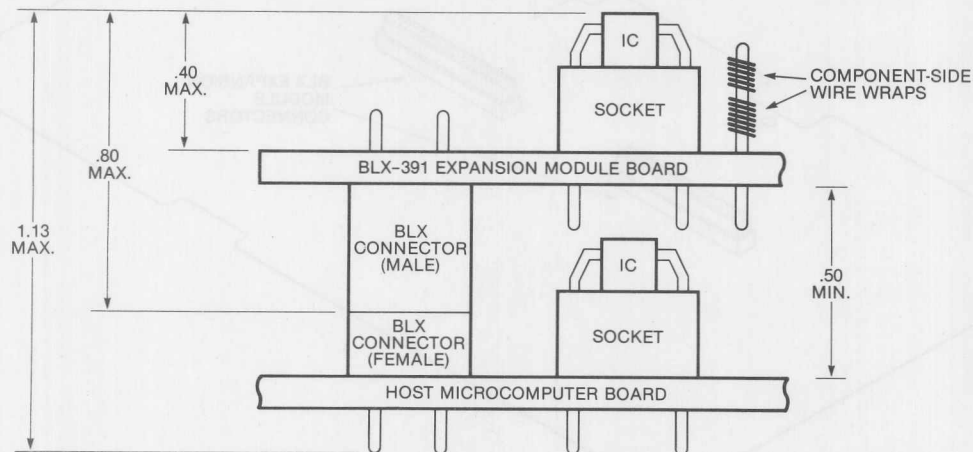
BLX-391 Expansion Module Mounting Clearances (inches)
